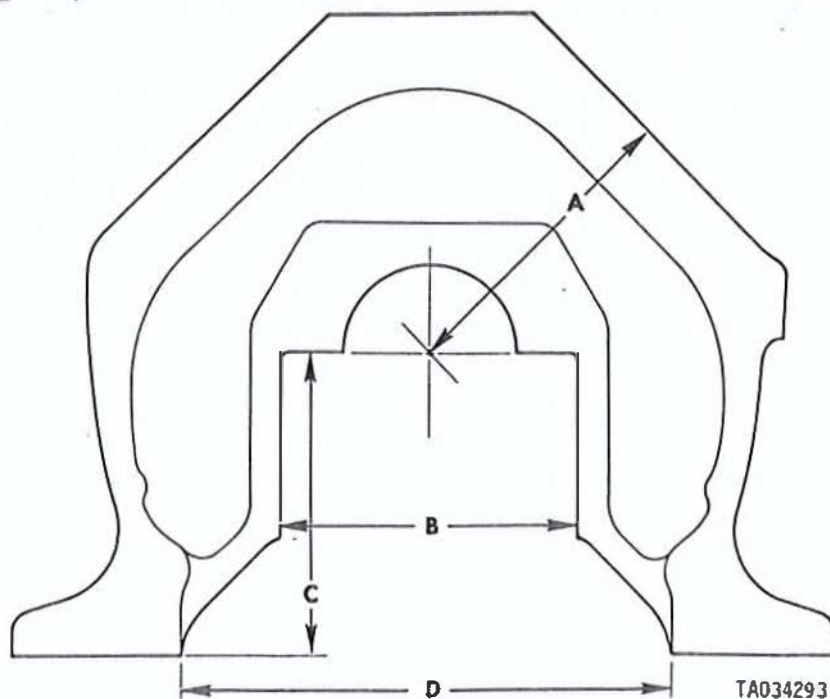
Points of measure for checking crankcase before and after welding repair.
